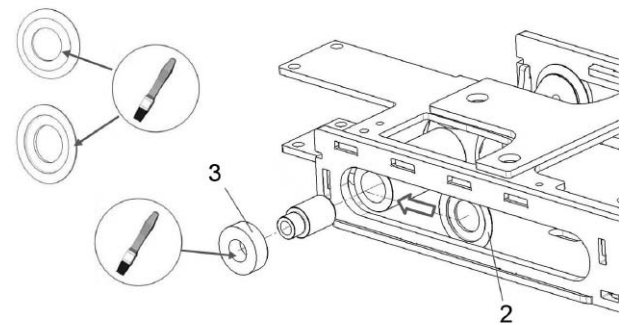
Lubricate the hole in the plate with grease before mounting the slide puck.
